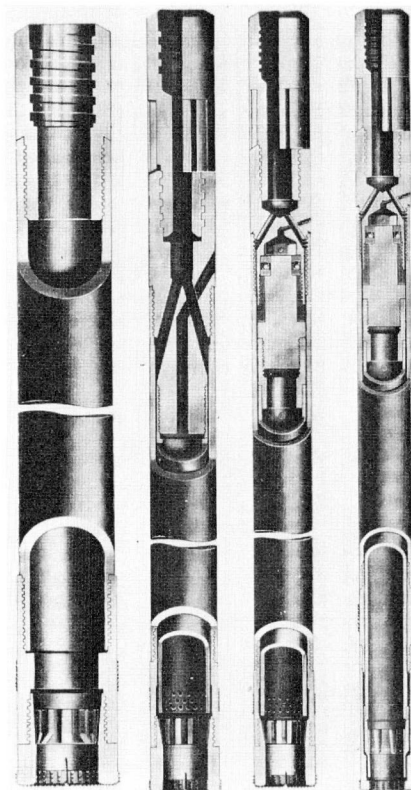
The four basic types of diamond drilling core barrels: from left to right, single tube, double tube rigid-type, double tube swivel-type, and double tube swivel-type M series (adapted from Acker, 1974). (GSC 202921-W)
